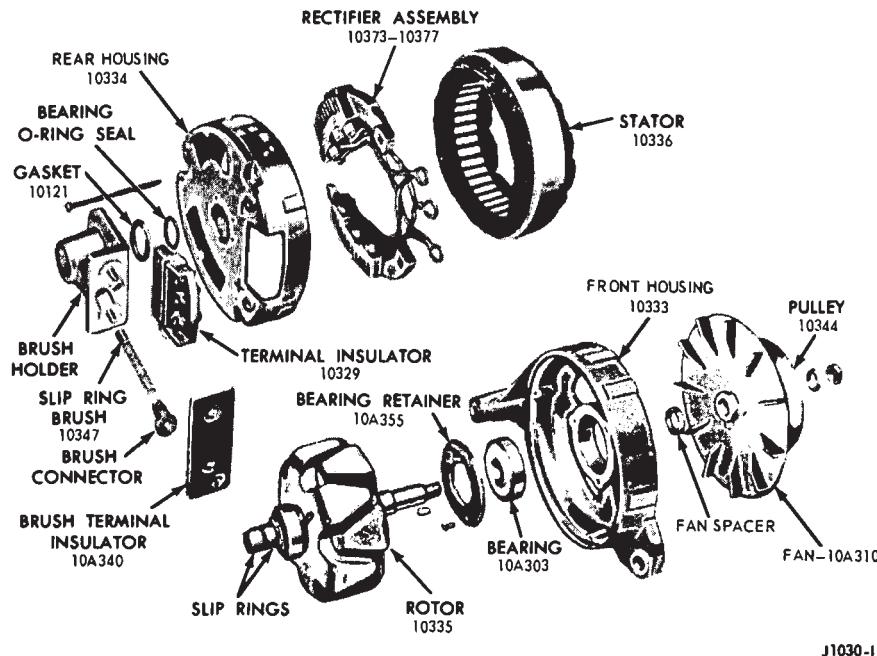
Disassembled 65-Ampere Leece Neville Alternator
